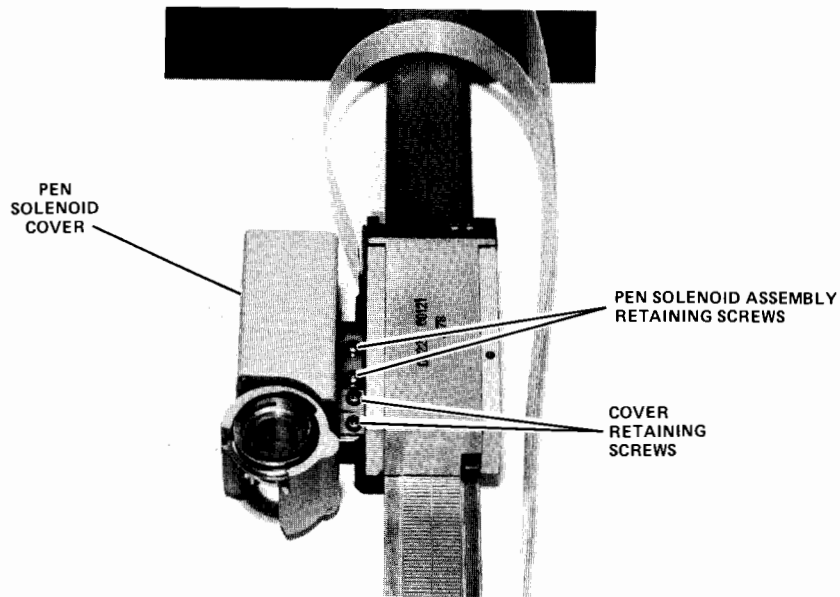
Pen Solenoid Cover and Solenoid Assembly Removal
